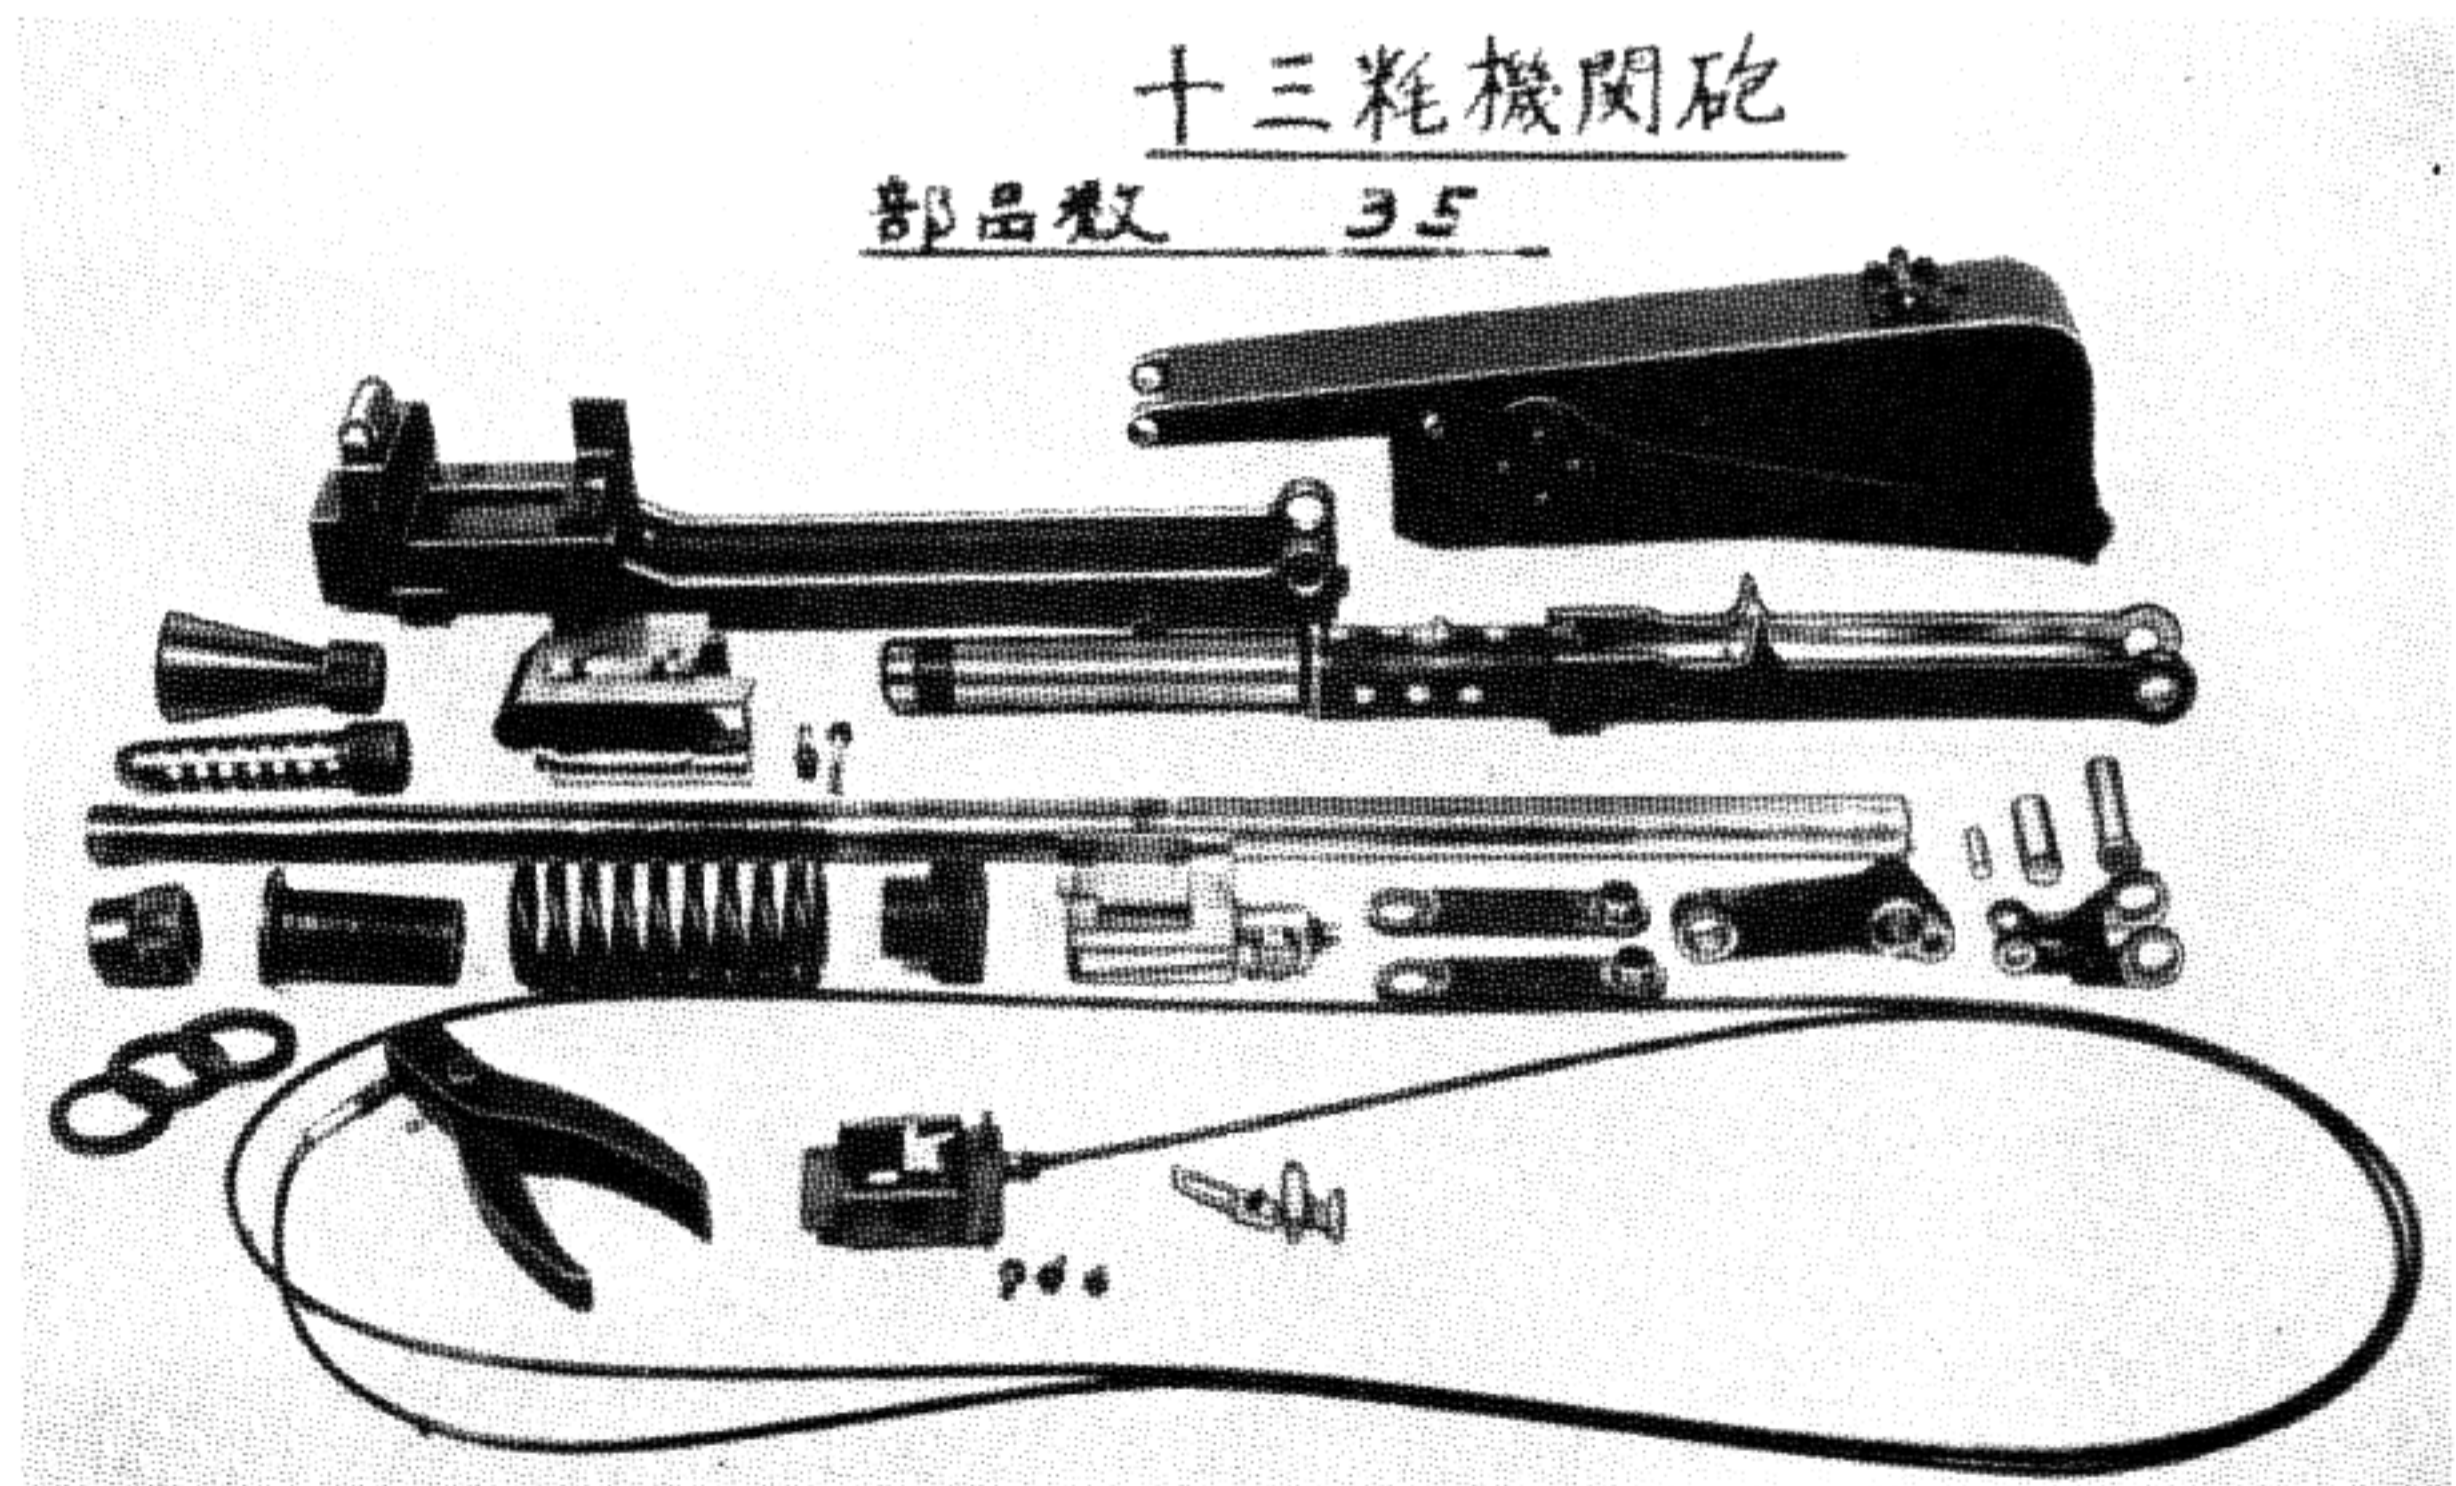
Japanese 13-mm Belt-Fed Machine Gun, stripped.
